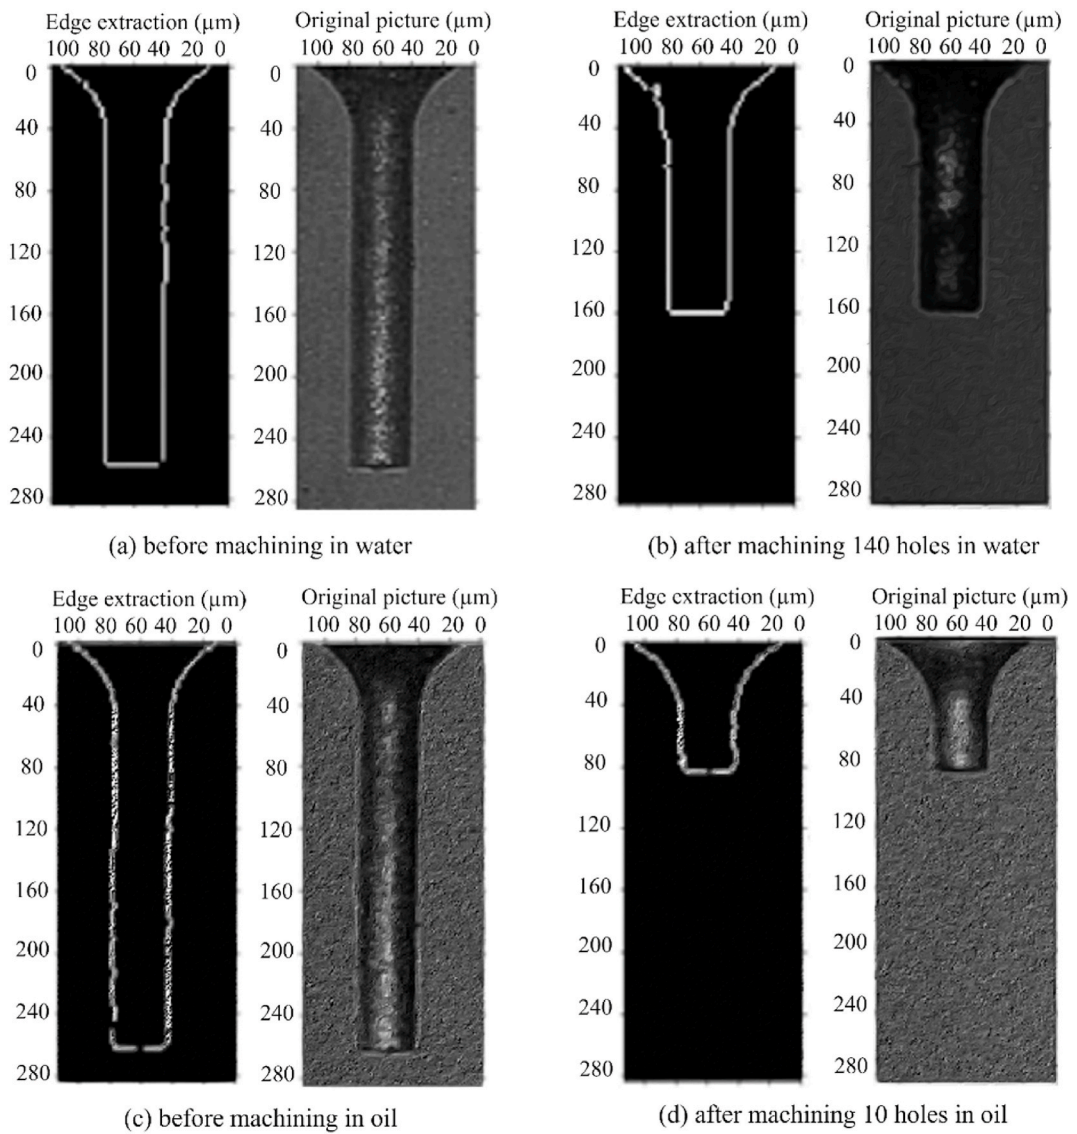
Alteration in the appearance of tungsten electrodes (a) before machining in water, (b) after machining 140 holes in water, (c) before machining in oil and (d) after machining 10 holes in oil [31].
